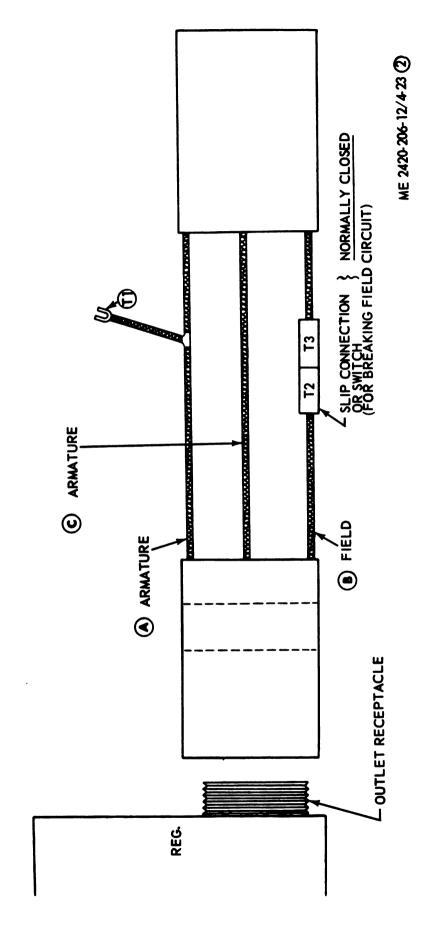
Generator regulator, testing, removal and installation (sheet 2 of 2).
